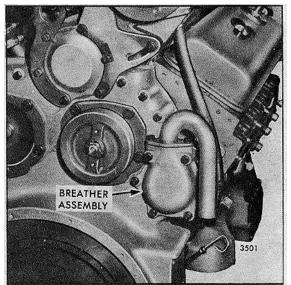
Typical Mounting of Breather Assembly at Accessory Hole in Flywheel Housing
